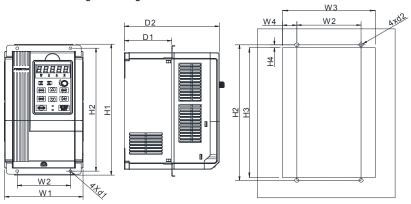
4^{\sim} 22kW Flange mounting installation diagram
